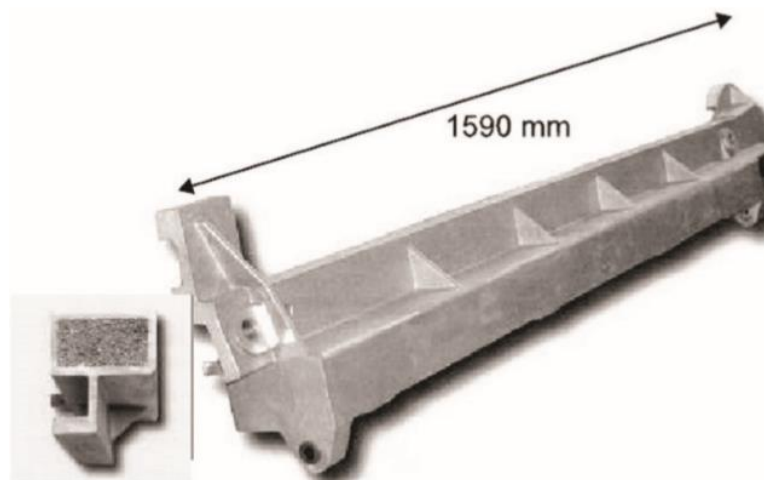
Machine tool cross beam with aluminum foam core [7]
